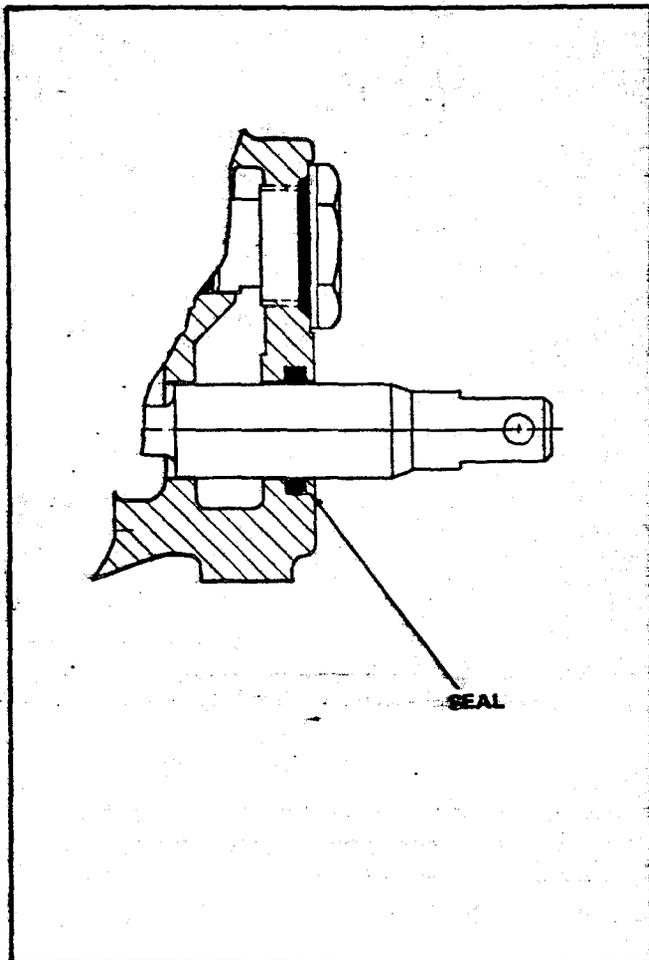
Spool Seal Assembly Prior to February 1, 1973.
